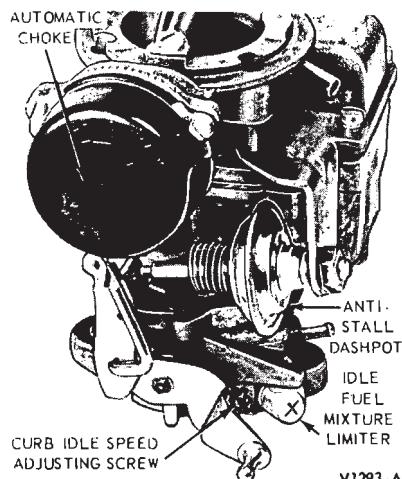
Carburetor Adjustments—Carter Model YF 1-V
